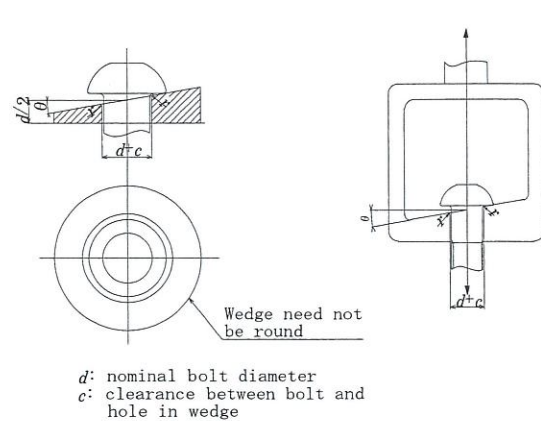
Wedge Dimension Fig. 5 Grip with inclined face
